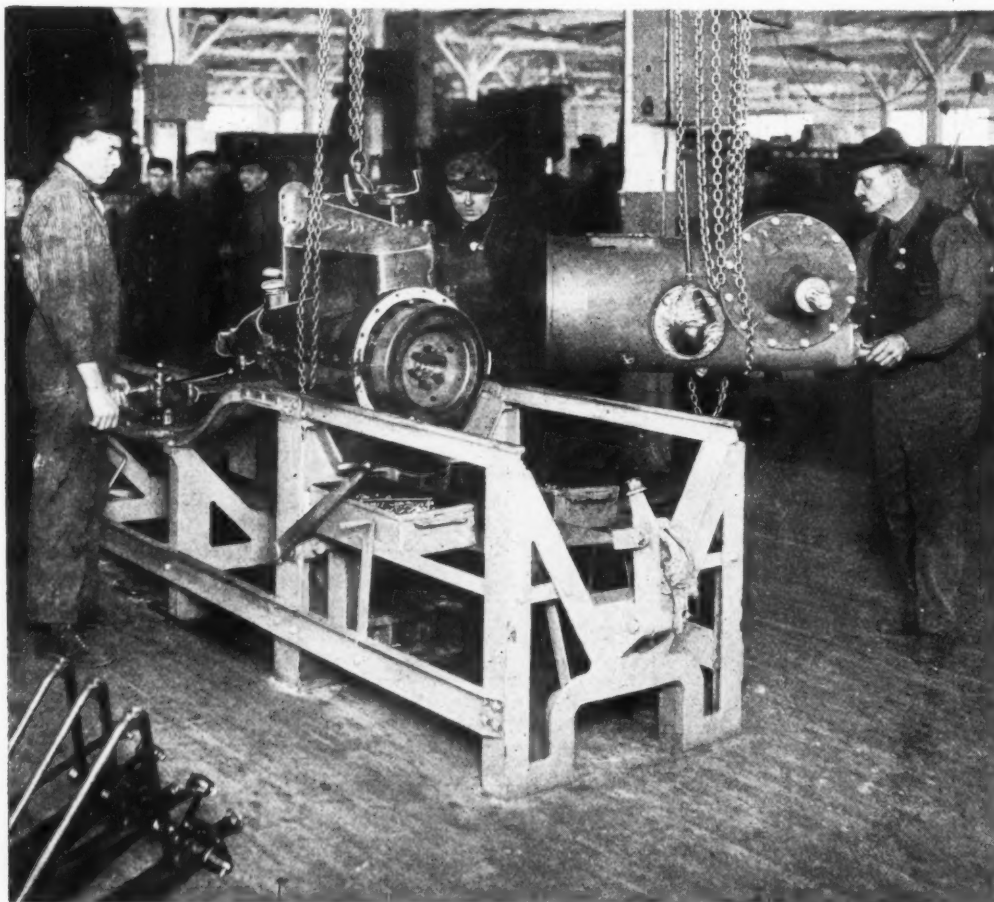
When the completed transmission housing assembly reaches the end of the chain it is swung over to the beginning of the tractor assembly track. This starts out with a stationary stand upon which the halves are first bolted together before they are pushed down an incline and enter upon the moving track
